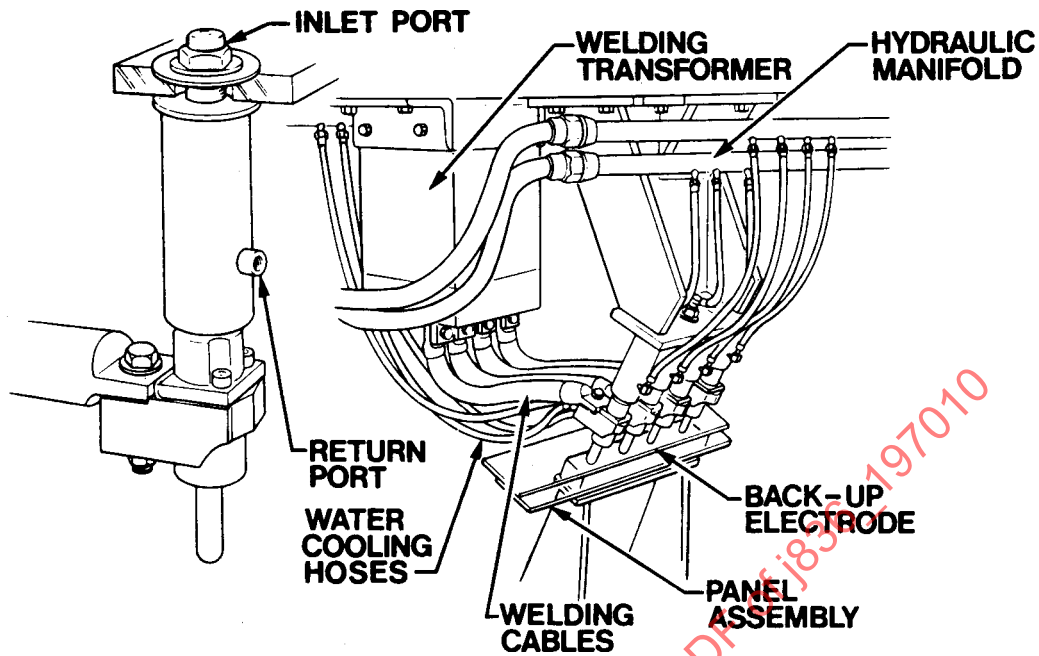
RESISTANCE-SPOT WELD SETUP
